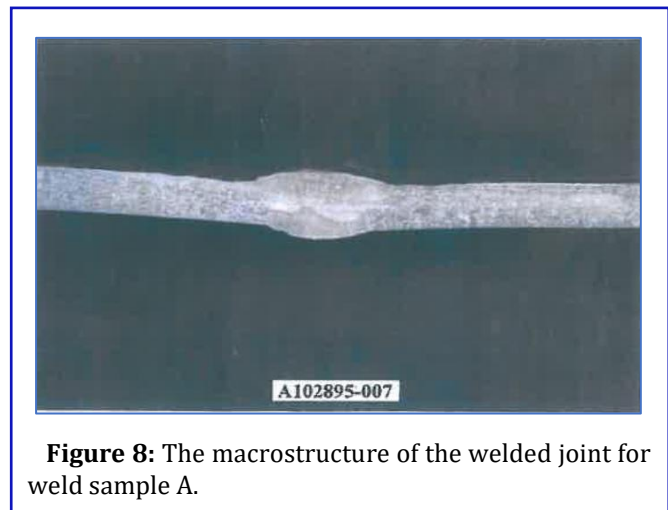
The macrostructure of the welded joint for weld sample A.
